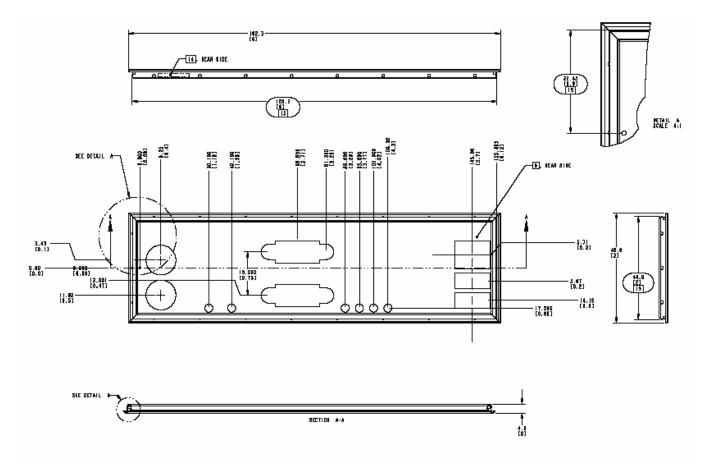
Pedestal Mount I/O Shield Mechanical Drawing for the Intel® Server Board S3200SH-V
